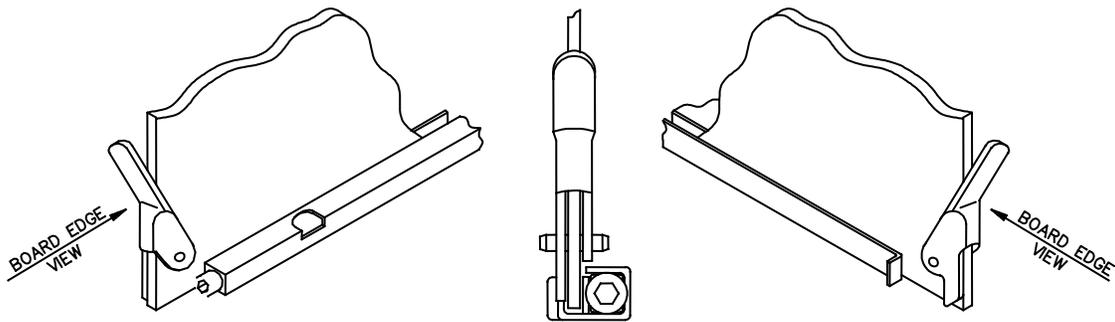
Extractor fastened to circuit card assembly (right hand extractor shown).
